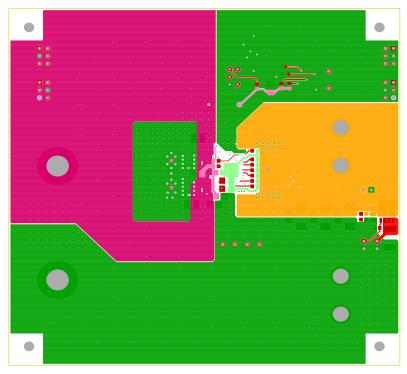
BOTTOM LAYER SOLDER SIDE
